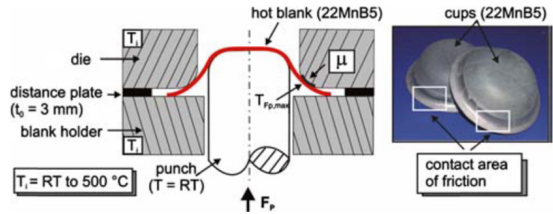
Schematic sketch of the experimental setup of the cup deep drawing test (left) and two drawn cups at elevated temperatures with the contact areas of the main friction between blank and tool pointed out (right)[44].
